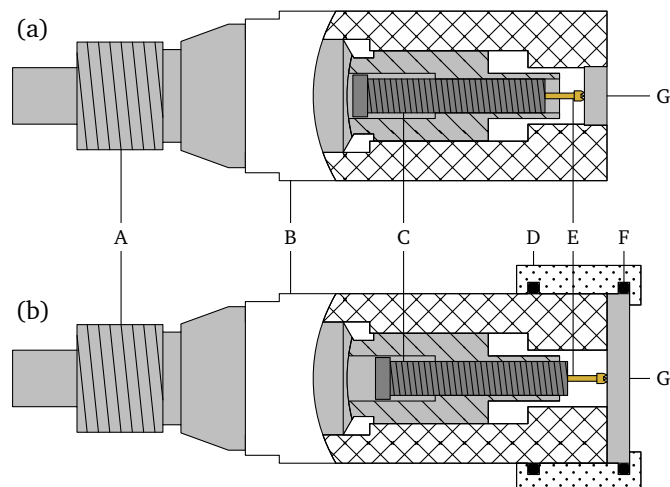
Assembled RDE for (a) 5.2 mm or (b) 15 mm wide discs: (A) stainless steel adapter, (B) PTFE sample holder, (C) set screw, (D) PTFE cap, (E) contact pin, (F) o-ring, (G) disc sample.
